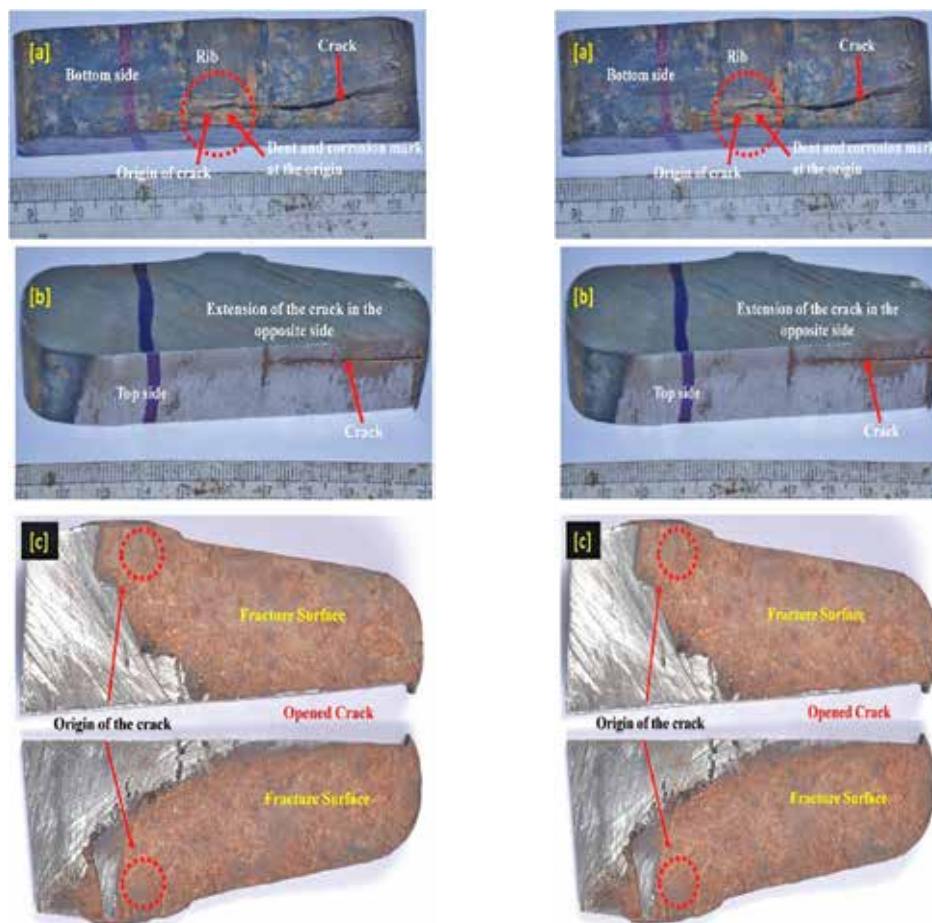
Macrographs of crack in different views: (a) Bottom side view of axle with the crack from the mid rib-showing dent and corrosion, (b) Top side view of axle also showing the crack, (c) Opening up (fracture surfaces) of the crack show corrosion/oxidation on the fractured surfaces.
